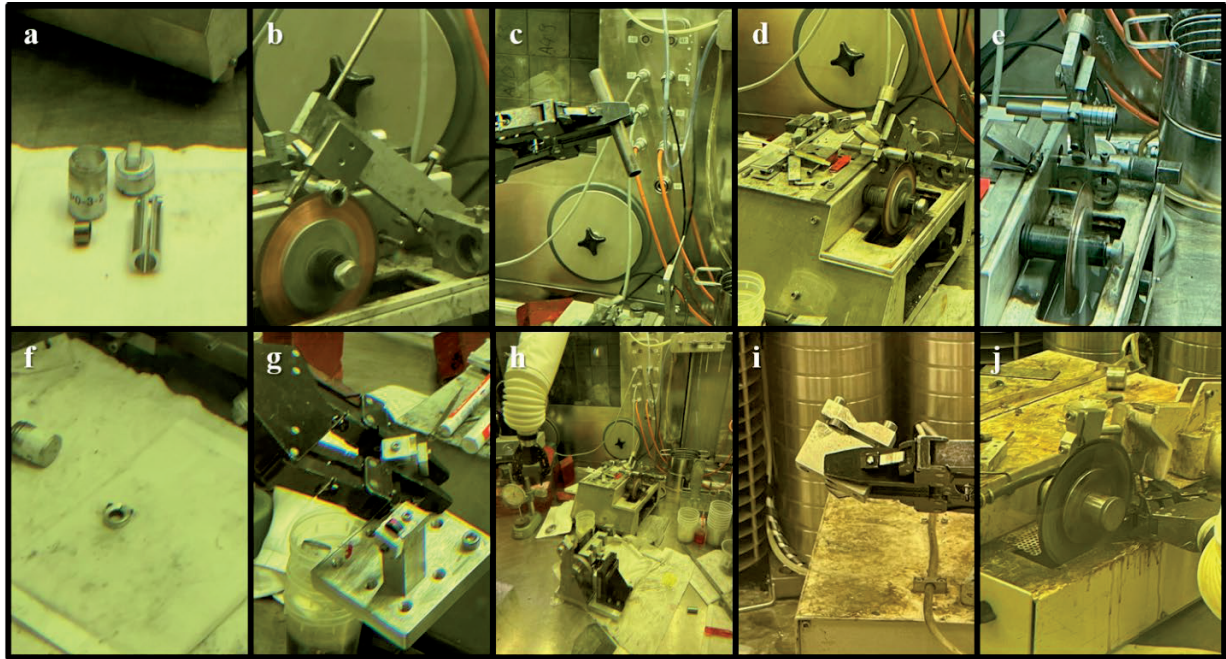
Overview of the cutting and notching of LK3/L and SINQ target rod material. a) 8 mm section of SINQ target material and holder, b) cutting of SINQ target rod, c) 90 mm section of LK3/L d) LK3/L material first cut, e) LK3/L sections of rings cut in holder f) cut ring of SINQ target material g) marking 90° sections for notching and cutting, h) notching device in hot cell, i) notched sample mounted for j) cutting in half ring as final specimen shape.
